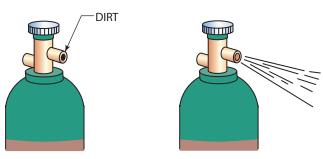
During transportation or storage, dirt may collect in the valve. Cracking the valve is the best way to remove any dirt.
